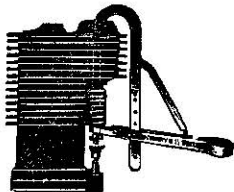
TERRY VALVE SPRING COMPRESSOR FOR S.V. ENGINES
